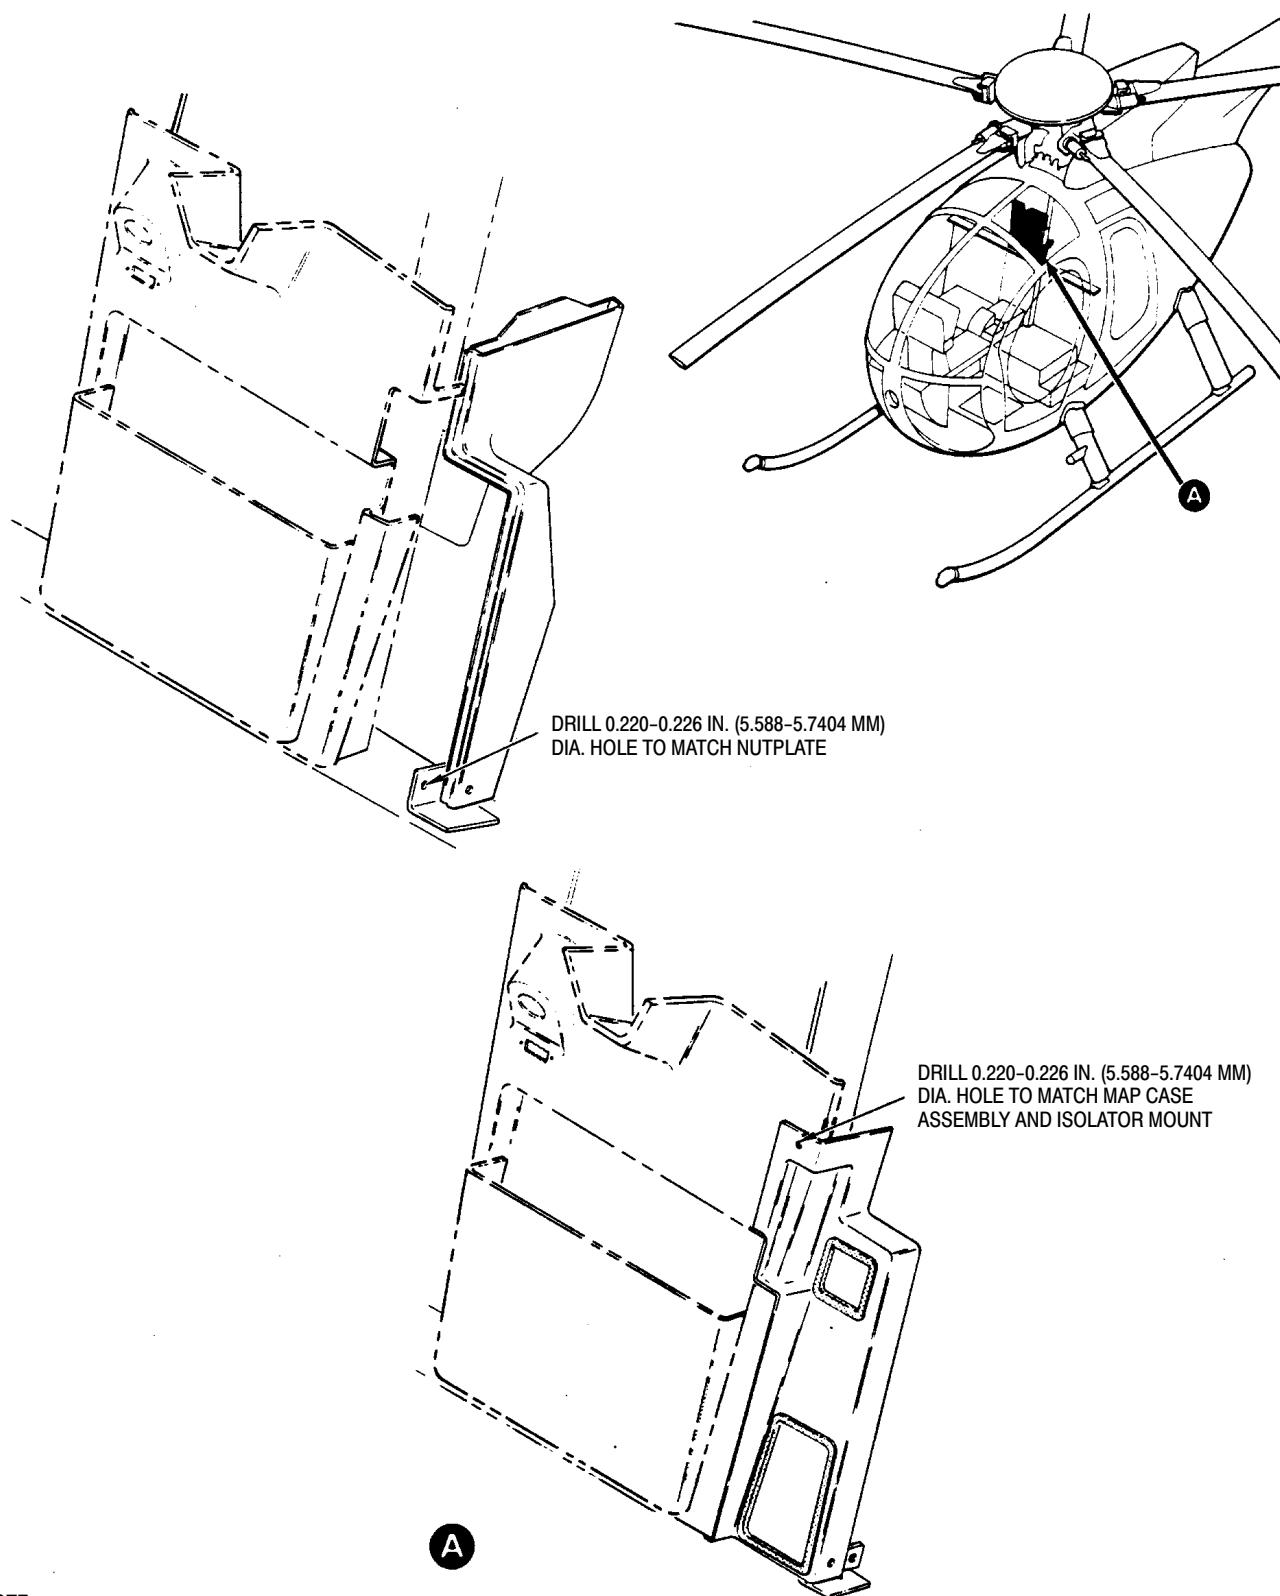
Modifying Rotor Brake Cover Panel Assemblies (Sheet 1 of 2)
